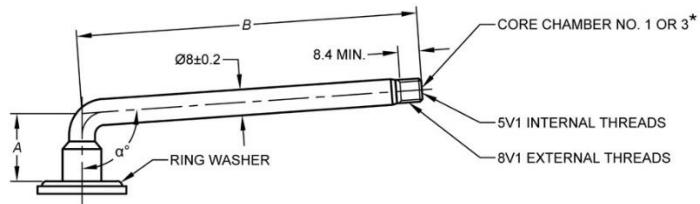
SCREW-ON UNIVERSAL TUBE VALVES HEAD SHAPE-TRUCK AND BUS VALVES
